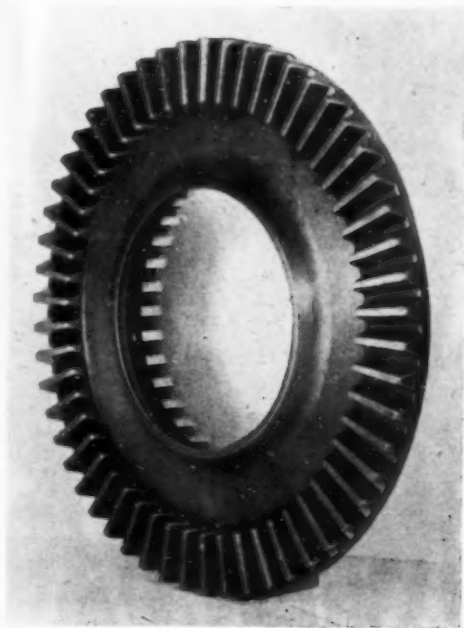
Bramo Fafnir 323P driving gear wheel.
